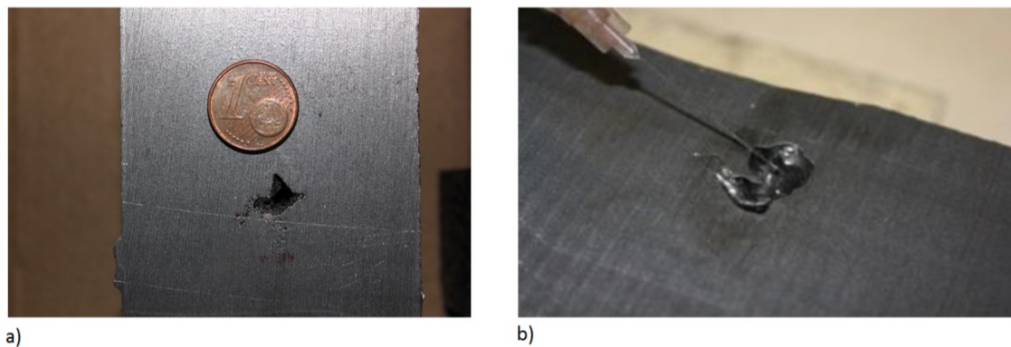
Example of a shrinkage defect in the test casting. a) Detail of the shrinkage volume after cut of the casting; b) Filling of the shrinkage volume defect with ethanol using a syringe.
